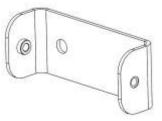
Item 1 - WALL MOUNT BRACKET, DX10
